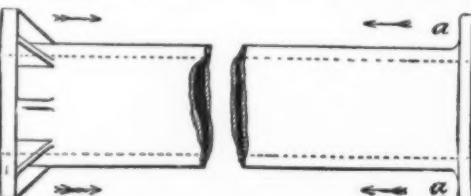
PIPE FLANGES WHICH ARE LIABLE TO FRACTURE.
